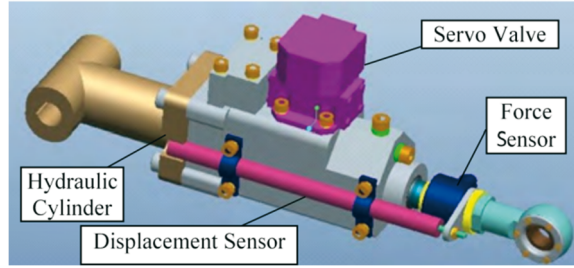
Schematic diagram of the electro-hydraulic servo drive unit assembly for the single leg knee joint
